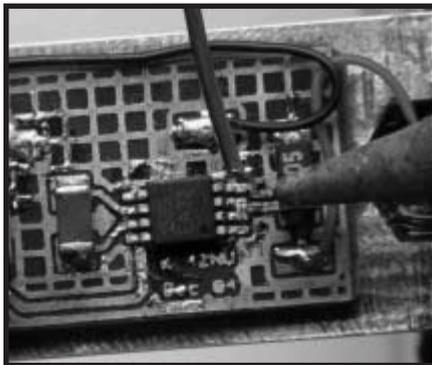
Hand-soldering SMD parts is possible if you learn some new techniques. First of all, the board must be horizontal so the parts don't slide off!
